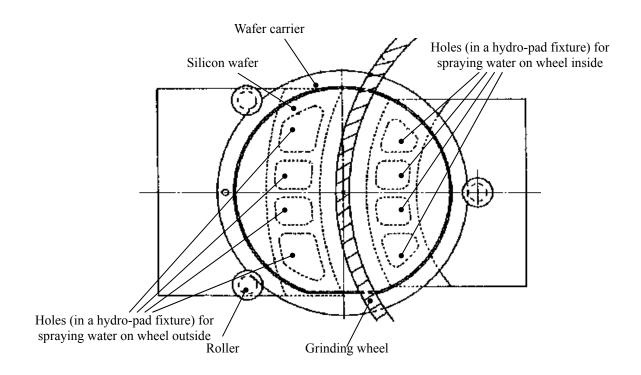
Support system that sprays water on both inside and outside of the grinding wheel (after [55]).
